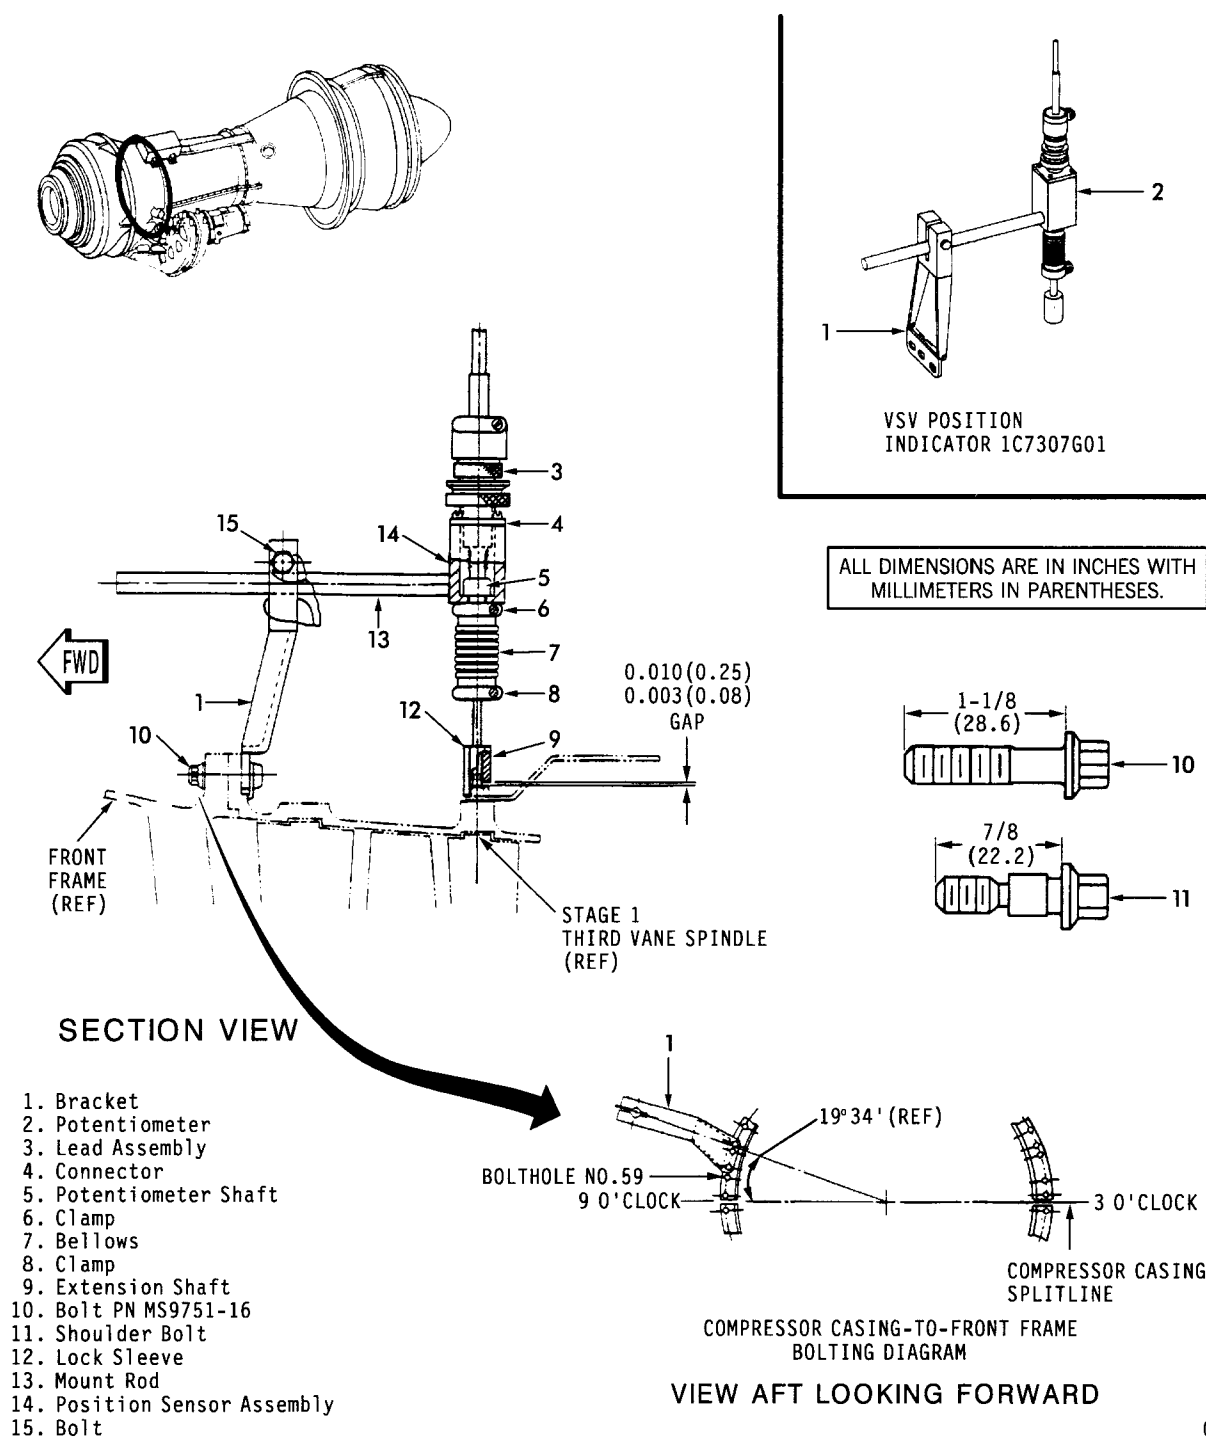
Rig Check of VSV System (Operating Condition), Using VSV Position Indicator IC7307G01 (Sheet 1 of 2)
